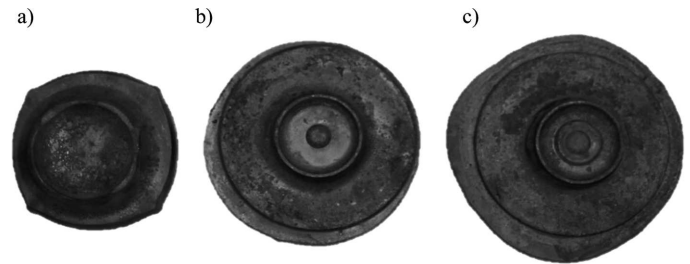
Shape of forging after particular forging operations: a) upsetting, b) preliminary die forging c) finishing die forging
